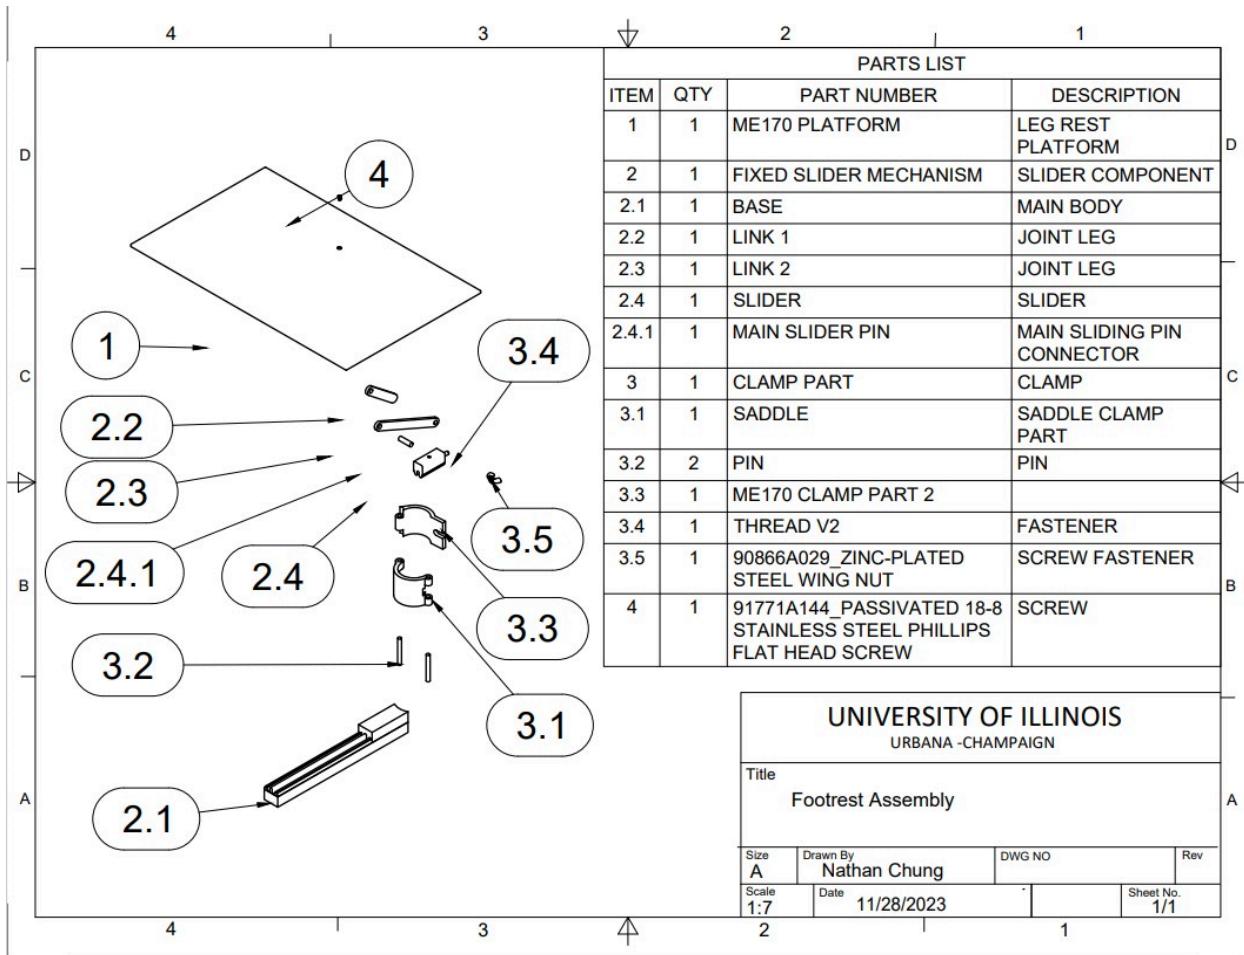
UofI Assembly Template Exploded Part Drawing
